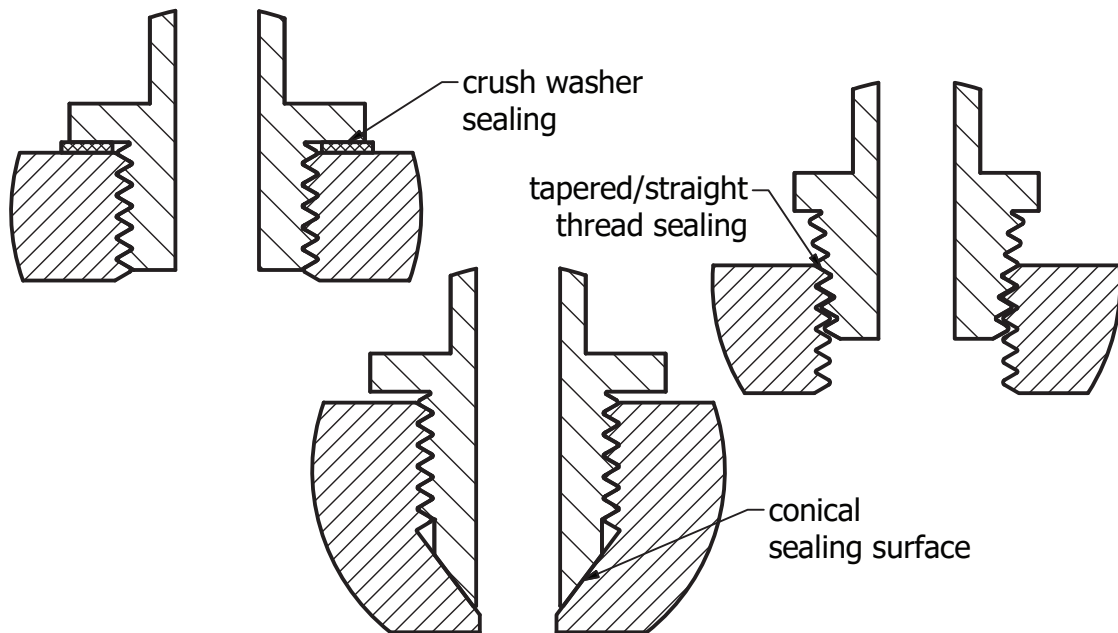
The three types of metal-metal seal threaded fitting options.
